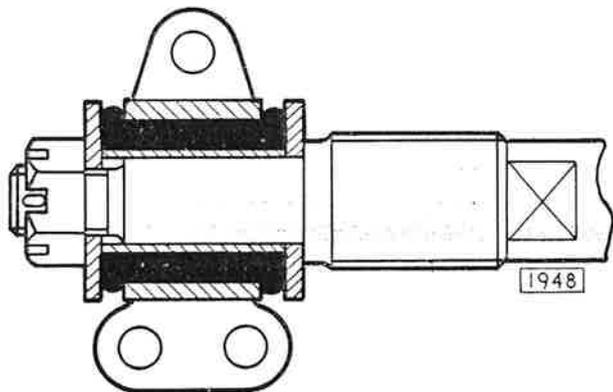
Section through one of the upper wishbone rubber/steel bushed mounting brackets.
